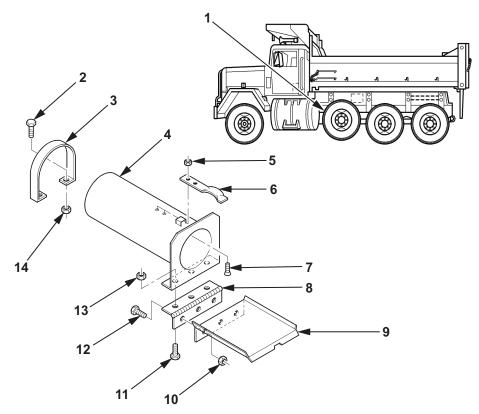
Tarpaulin Tube, Door, Hinge, and Spring Fastener Installation.
